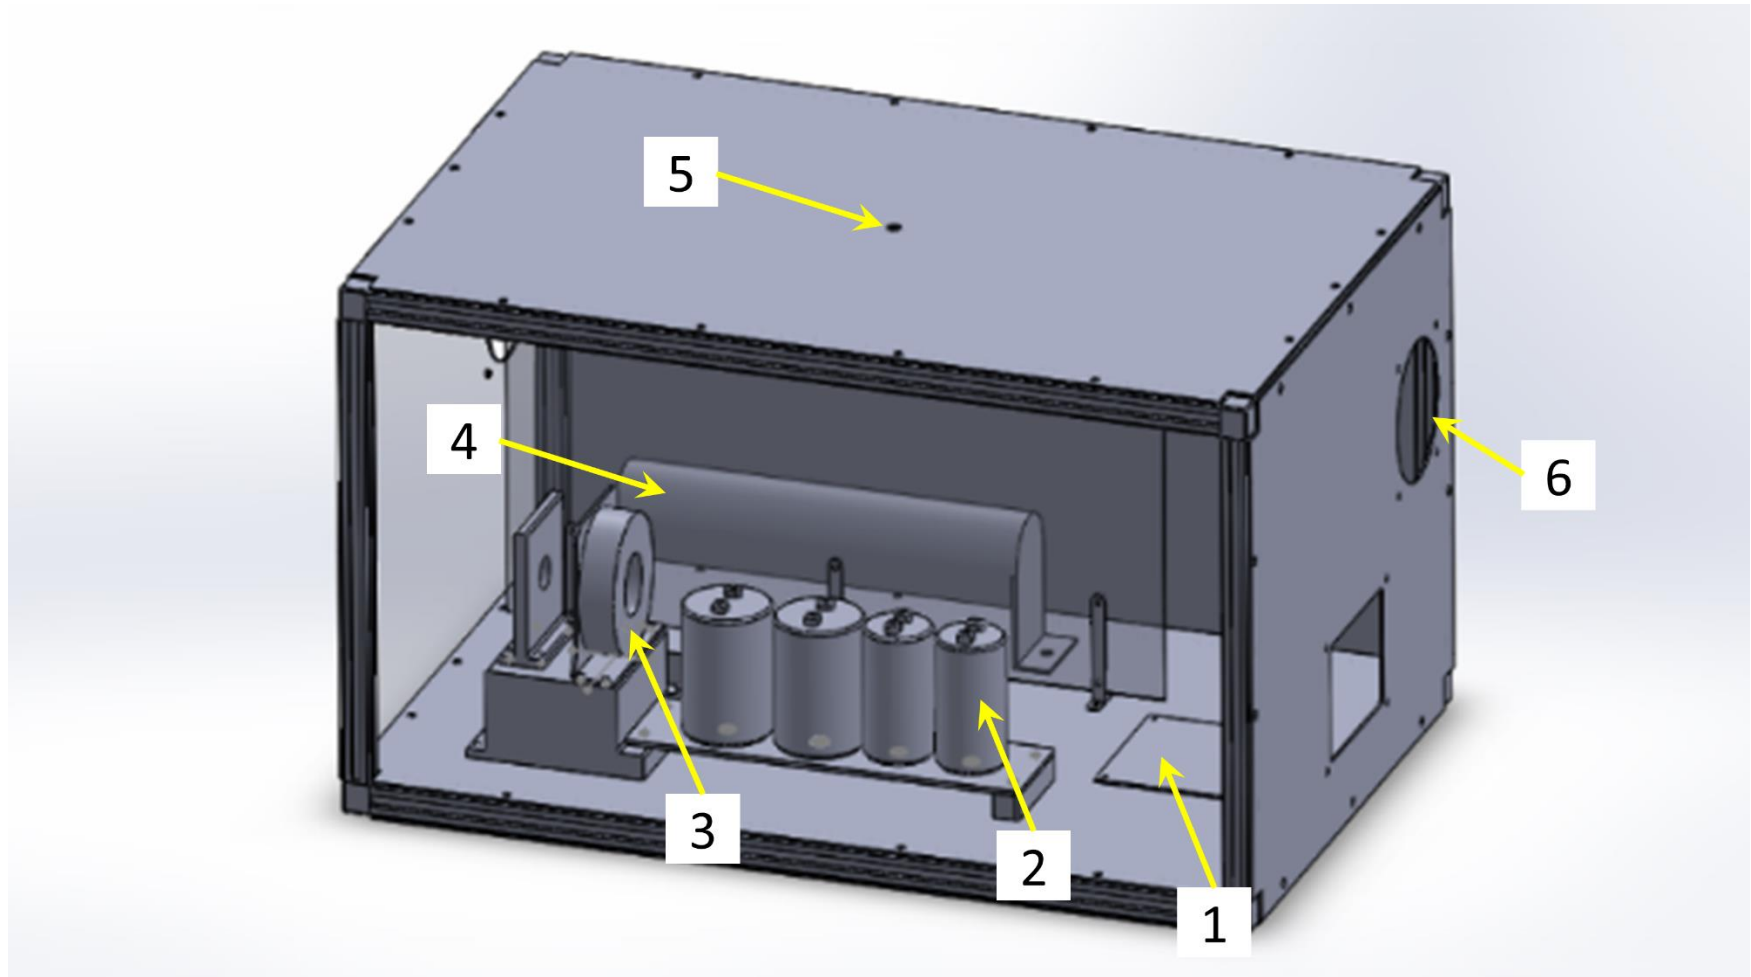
The 3D design of pulse generator by assembling all necessary components, including (1) power supply board; (2) capacitors; (3) Hall sensor; (4) resistor; (5) hole for emergency button; (6) hole for cooling fans.
